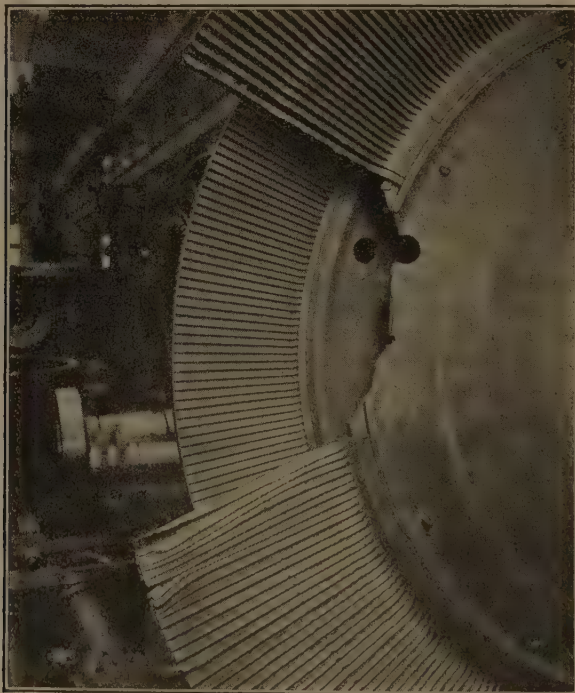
BROKEN TURBINE BUCKET WHEEL; 9TH STAGE OF 15,000-KW. 1800-R.P.M. 9-STAGE TURBINE
